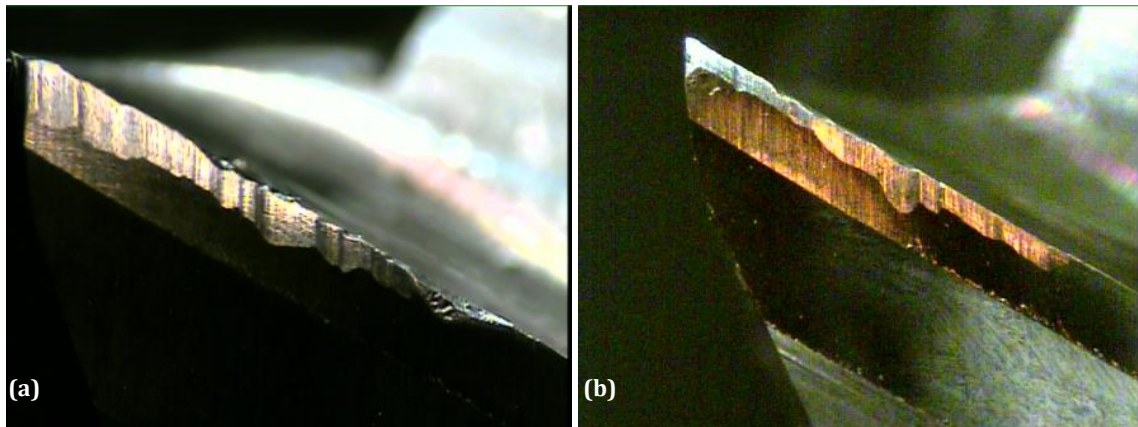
Tool wear generation (a) VB = 0.29 mm (b) VB = 0.27 mm
